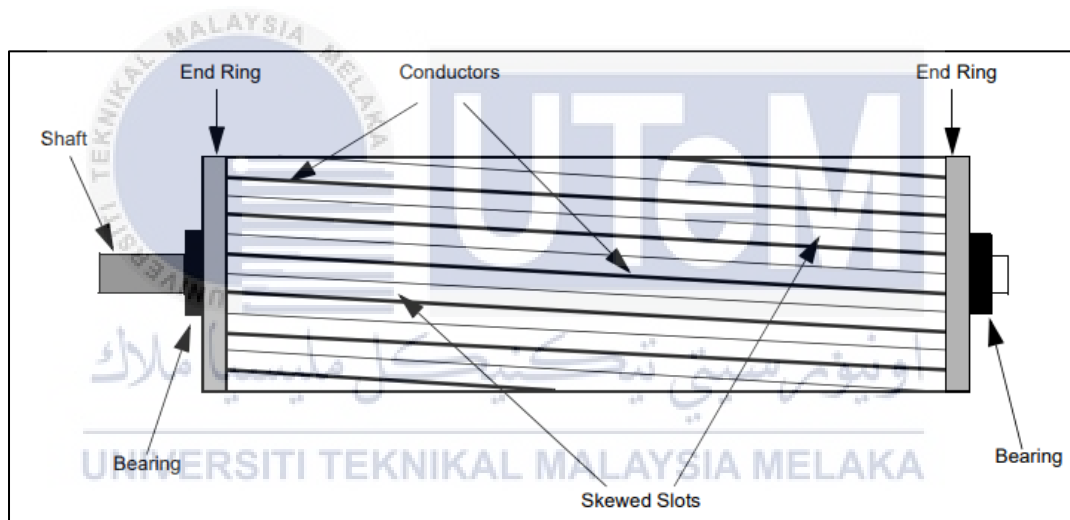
An Induction Motor Rotor for squirrel cage design with labelling [5]
